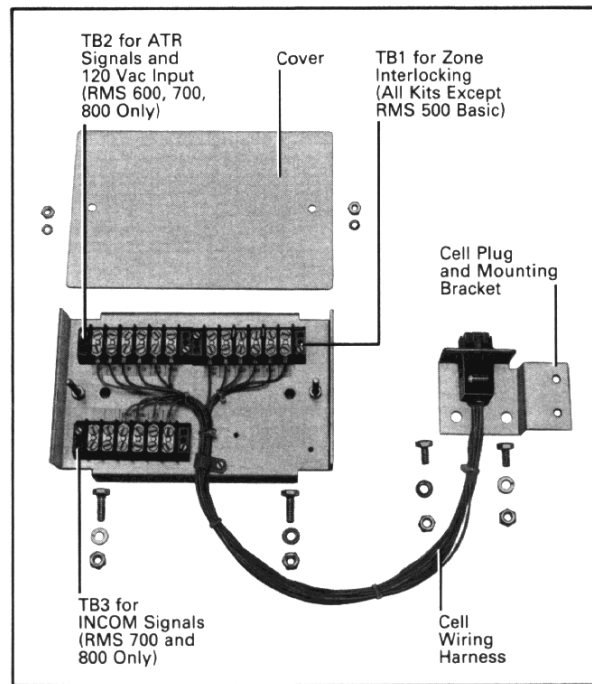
Cell Plug, Wiring Harness, and Terminal Block Assembly
